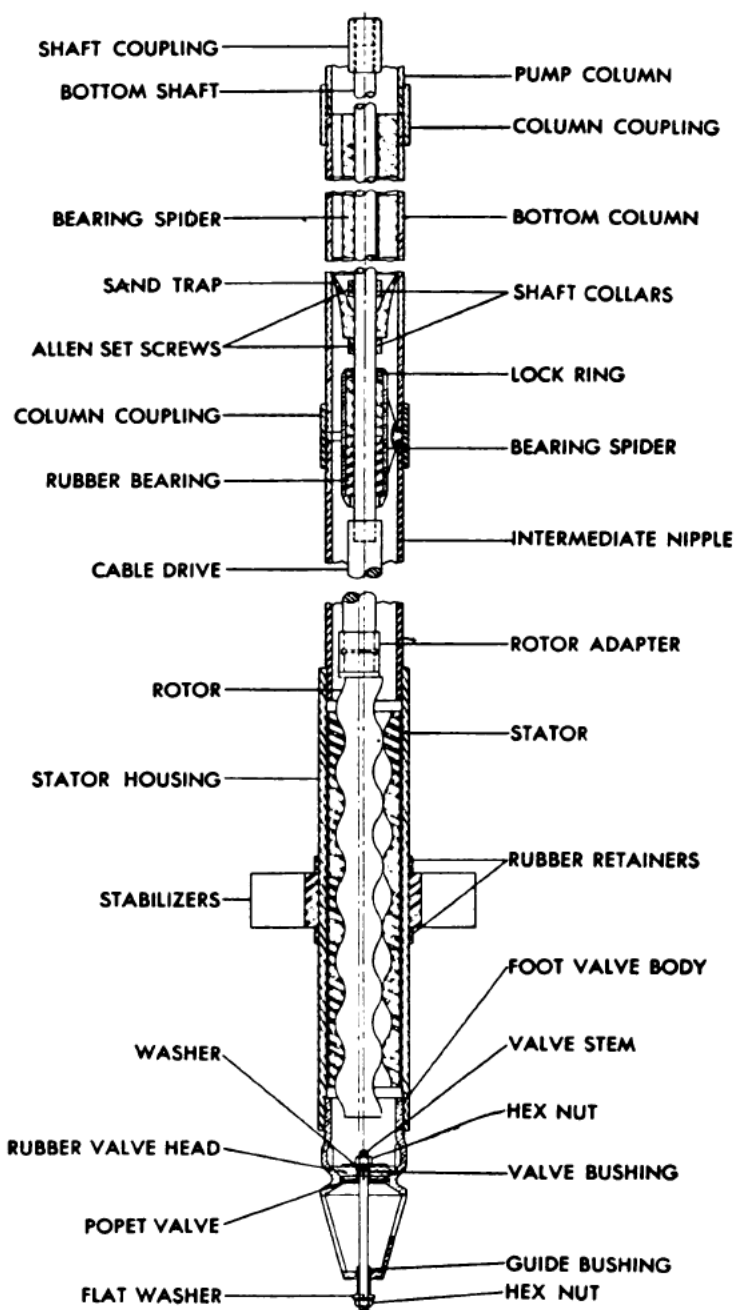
Bowl assembly of a Hi-Lift pump.
